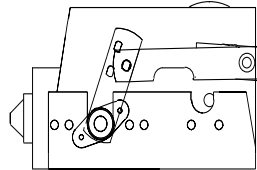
CAB ASSEMBLY (SHEET 5 OF 6)
